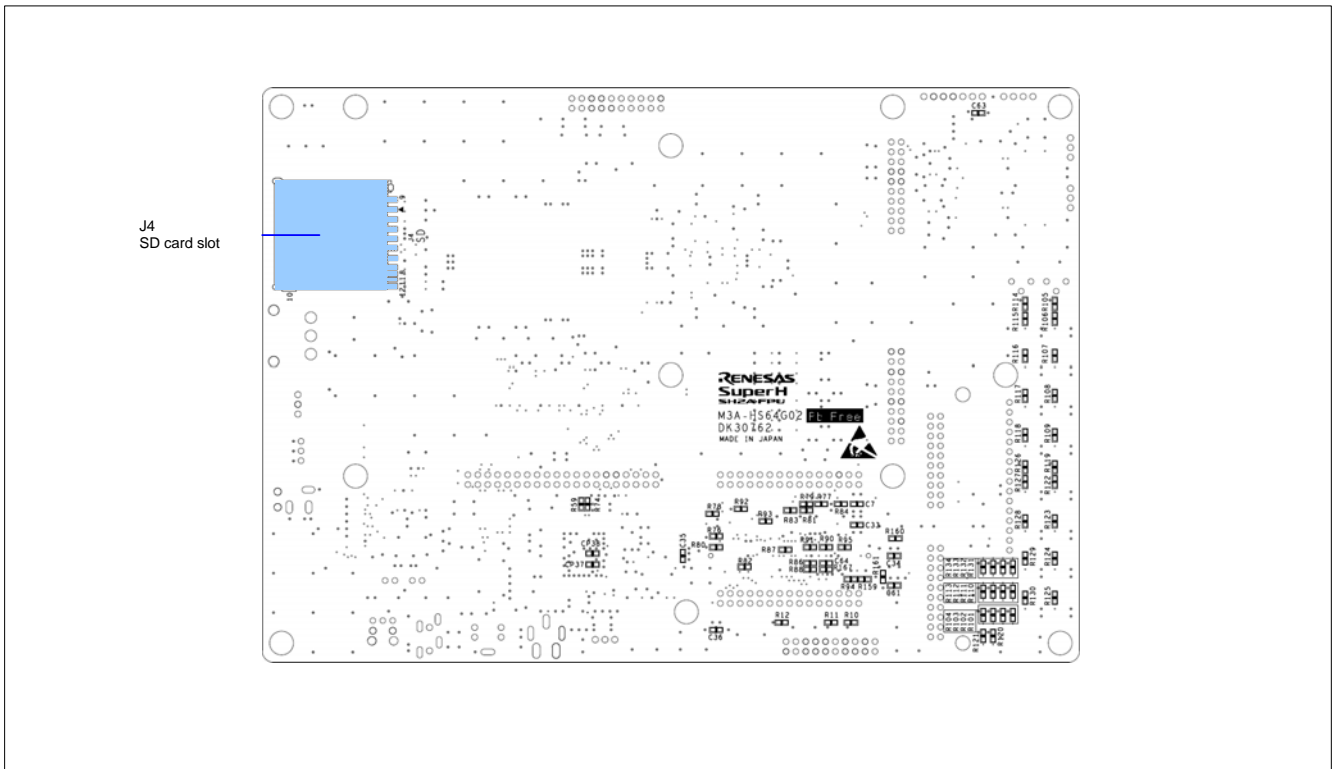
M3A-HS64G02 Layout and Component Placement (Top View of the Solder Side)
